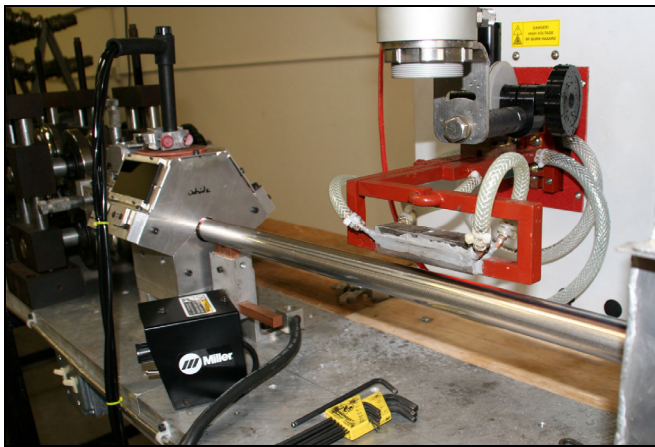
Tube mill weld-zone with inductor installed, material travel from left-to-right.
